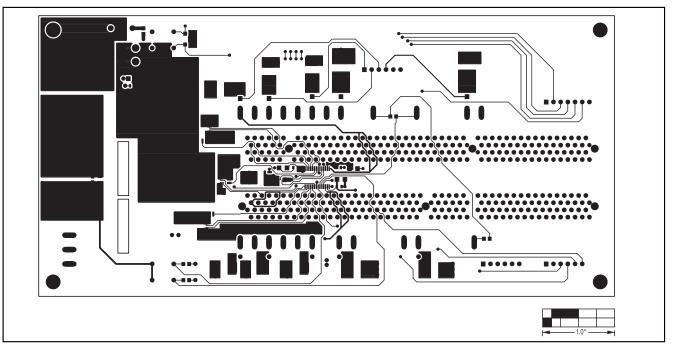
MAX5915 EV Kit PC Board Layout—Component Side
